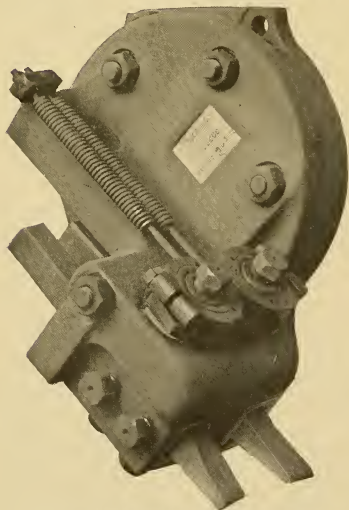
AN ENLARGED VIEW OF ONE OF THE DOUBLE-CUTTING TOOL BOXES ON THE ABOVE PLANER
